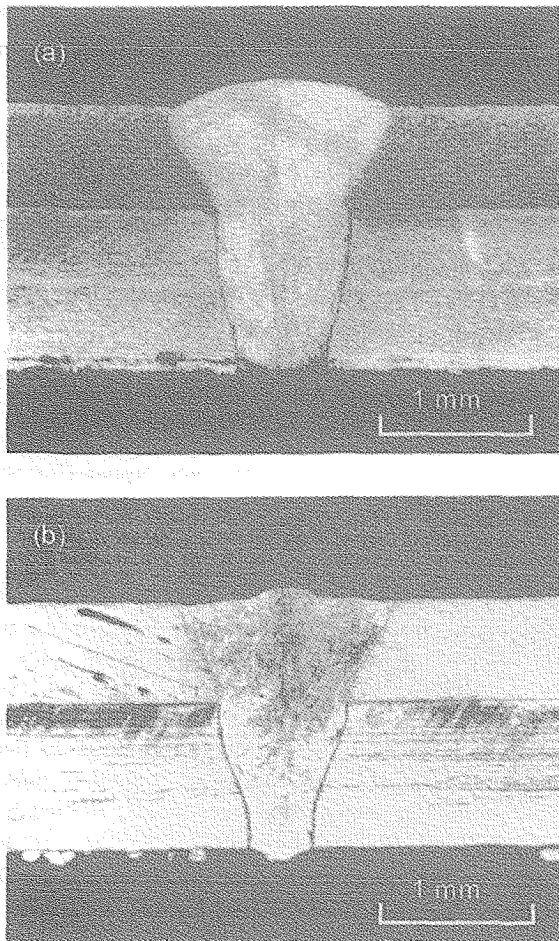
Low magnification stereoscopic photographs of cross sections taken from laser welds of Fig. 3
